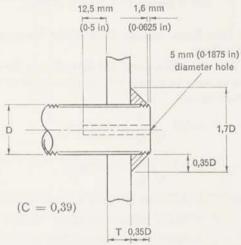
Attachment of Firebox and Combustion Chamber Stays
